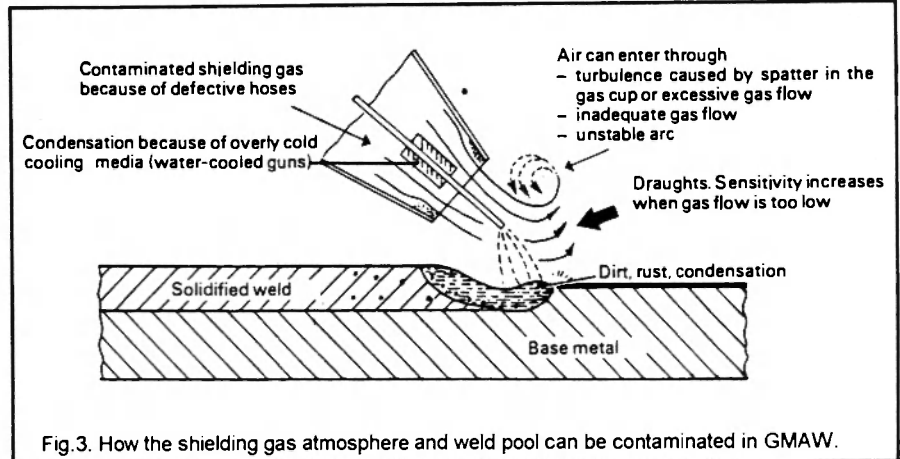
How the shielding gas atmosphere and weld pool can be contaminated in GMAW.
